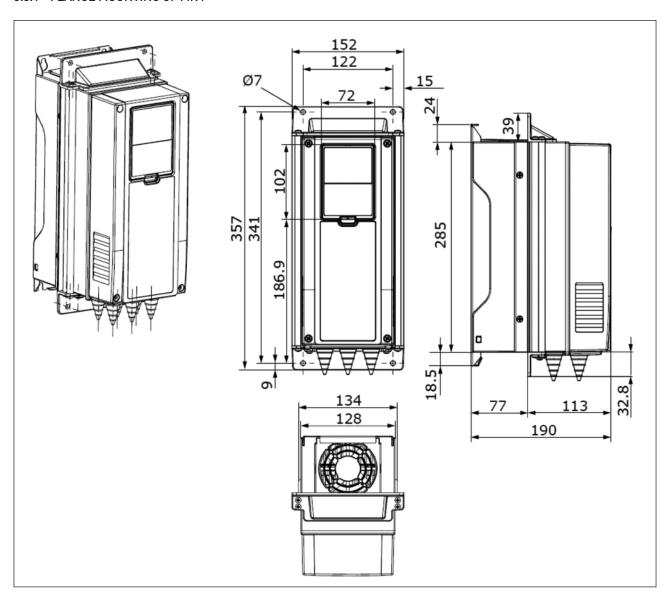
The dimensions of the AC drive, flange mounting, MR4
